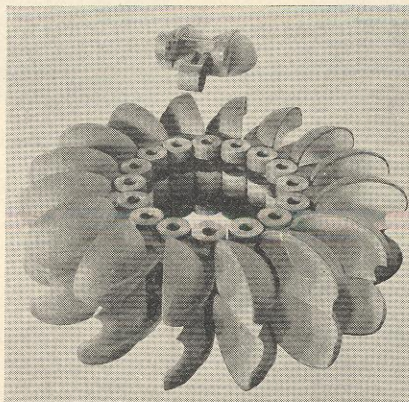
REAR VIEW OF A CHAIN-TYPE BUCKET AND A SET OF BUCKETS ASSEMBLED WITHOUT DISK
